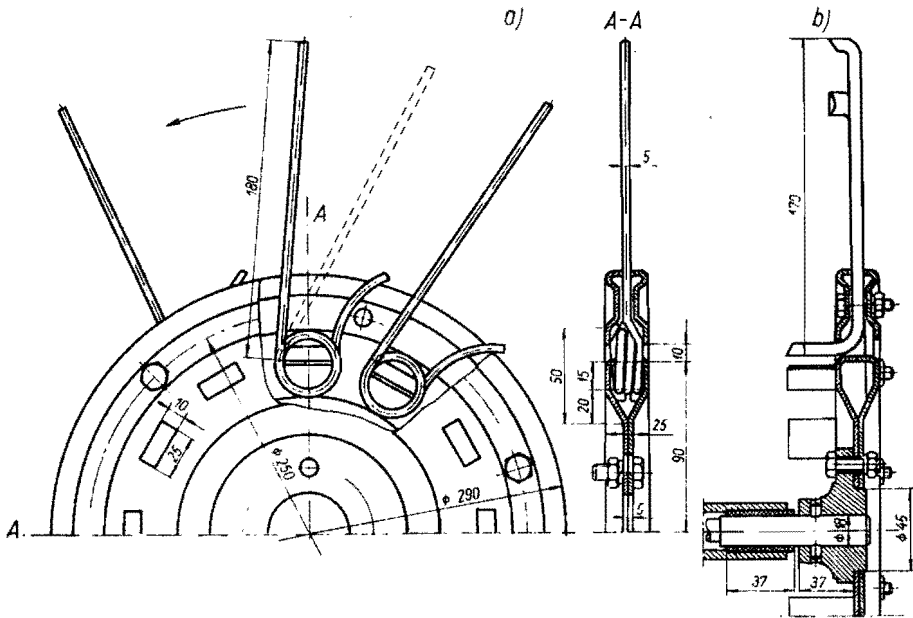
a) Example of a cutting head equipped with rods; b) example of a cutting head with blades — cross-sectional view.
